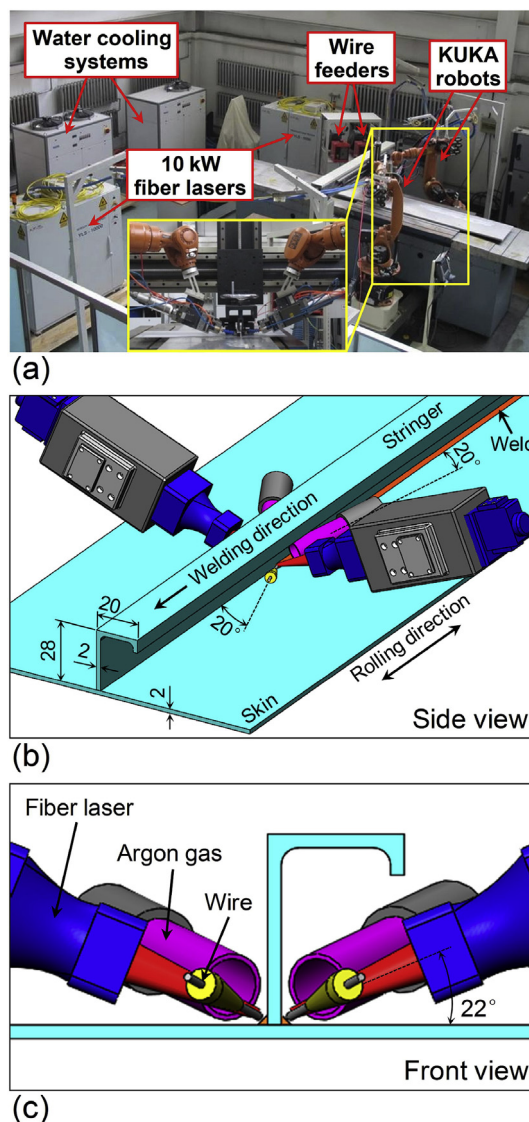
(a) Laser welding system, (b) and (c) schematics of double-sided laser beam welding process and angle parameters (unit: mm, degree).
